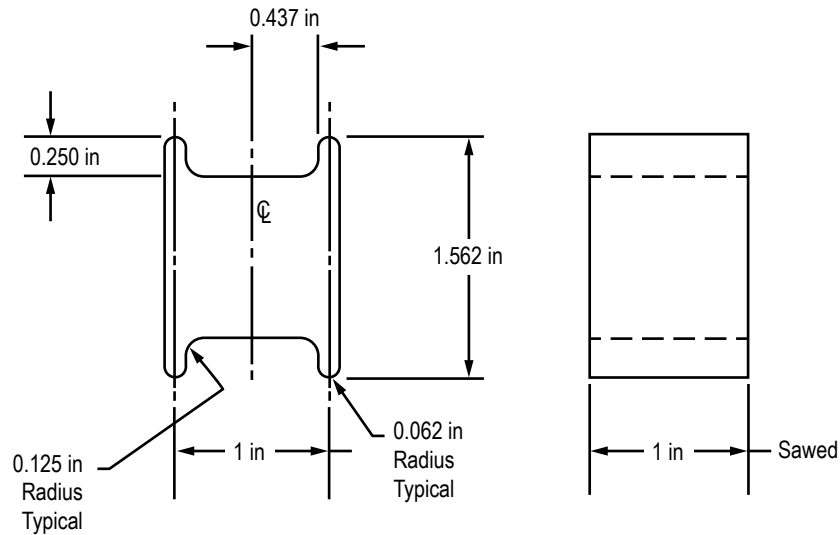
H-fixture for bent-beam stress corrosion assembly.
